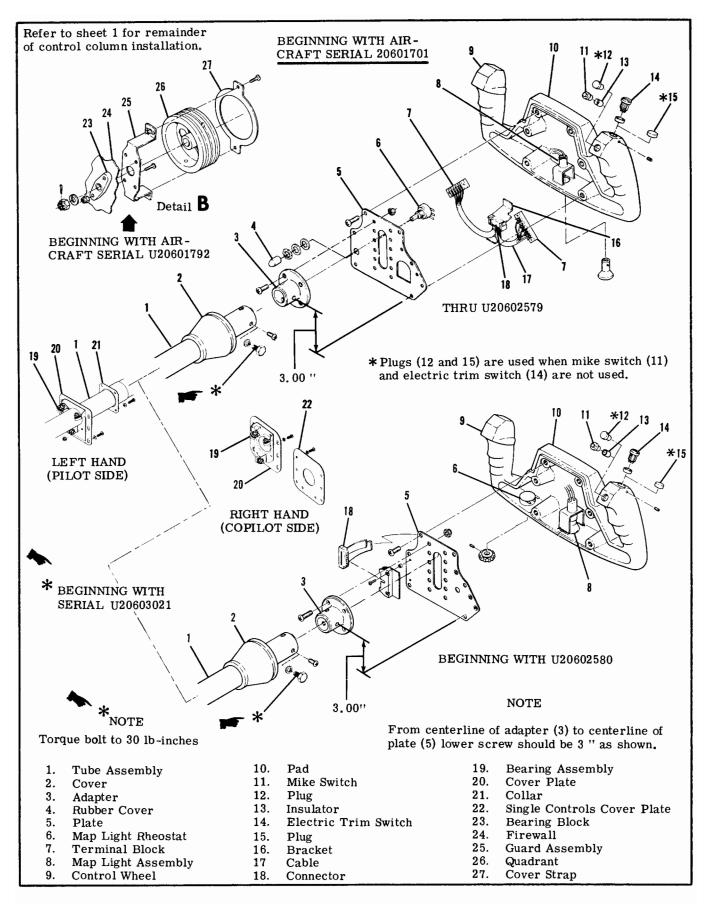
Control Column Installation (Sheet 2 of 2)
